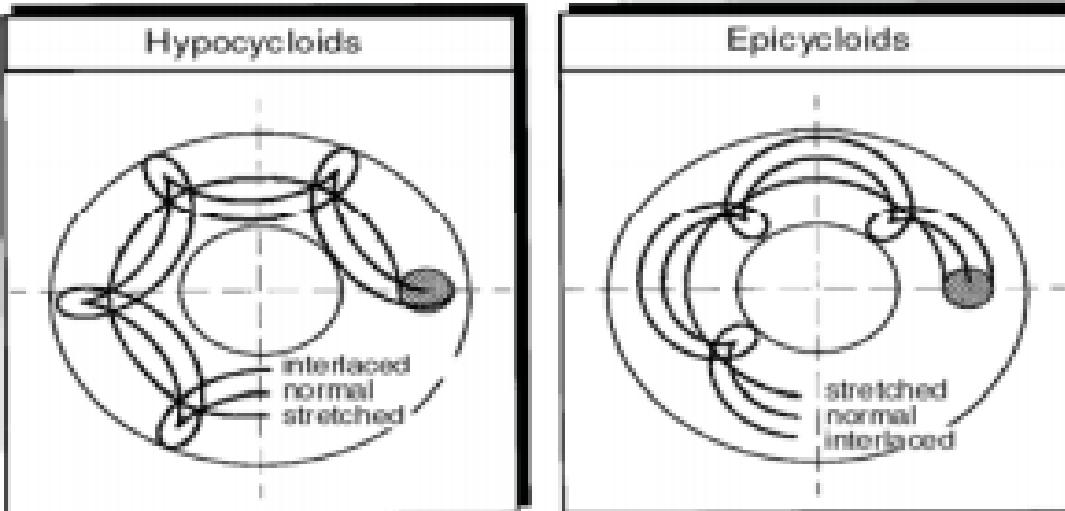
Machining paths of workpieces in double-disc lapping
